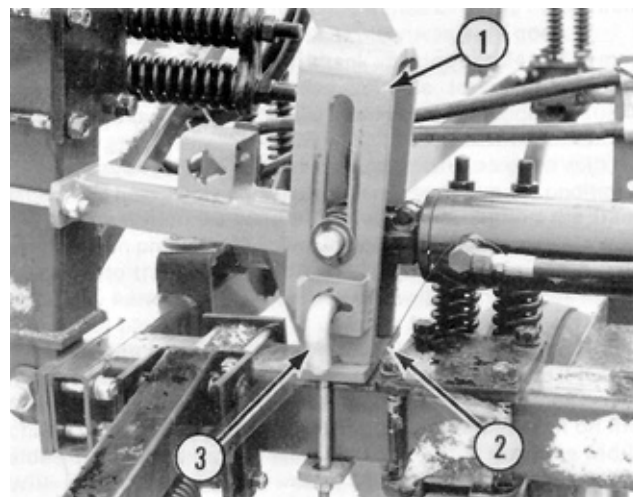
Wing Lock Assembly: (1) Cylinder Mount, (2) Wing Stop, (3) Safety Pin.
